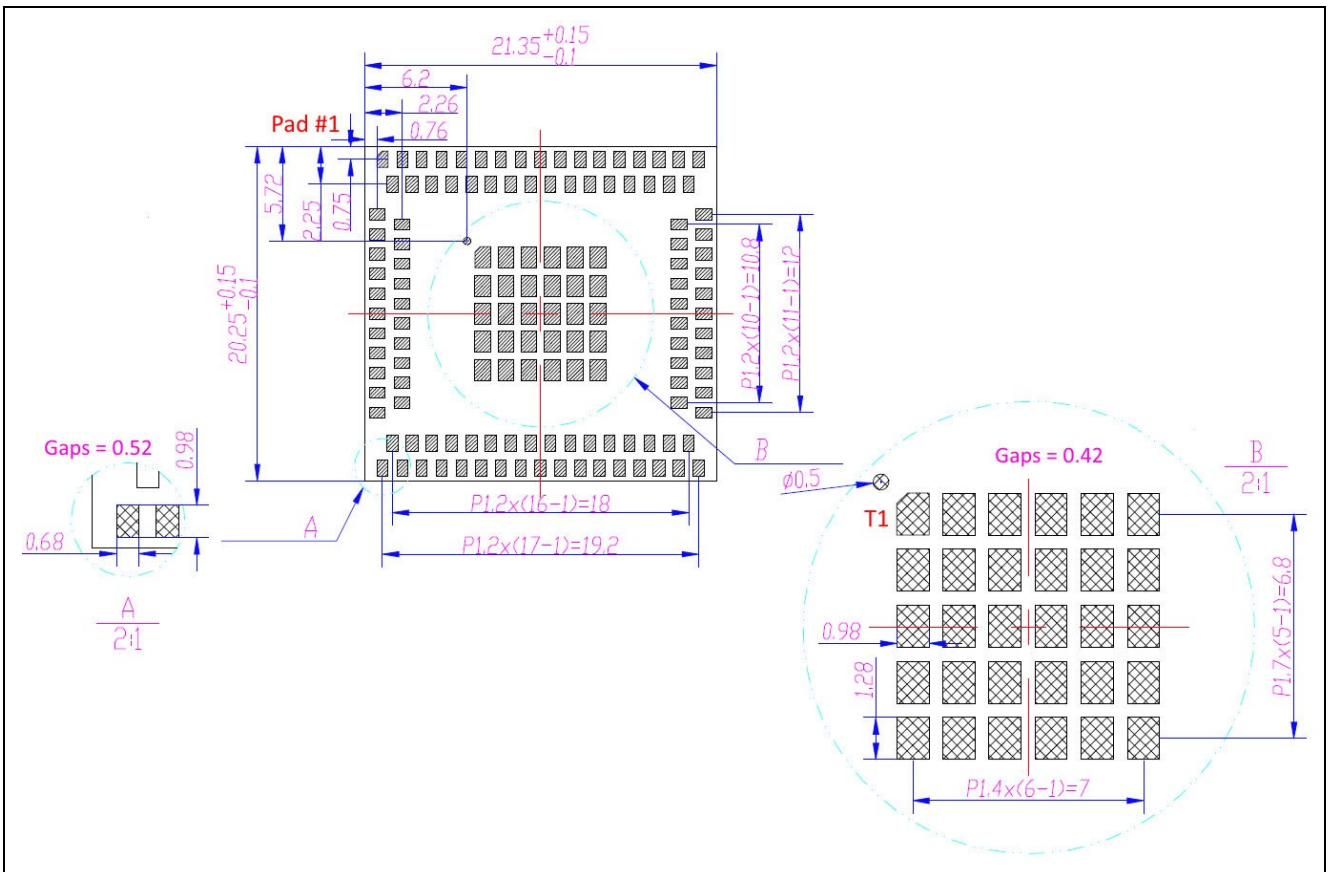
Module Detailed Bottom View and Dimensions (PCB View)
